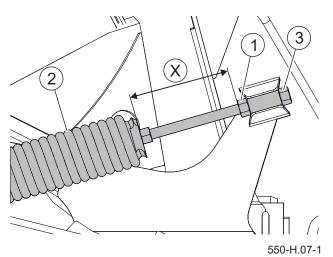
Adjustment of cutter bar pressure(1) lock nut, (2) stay spring, (3) adjustment bolt
